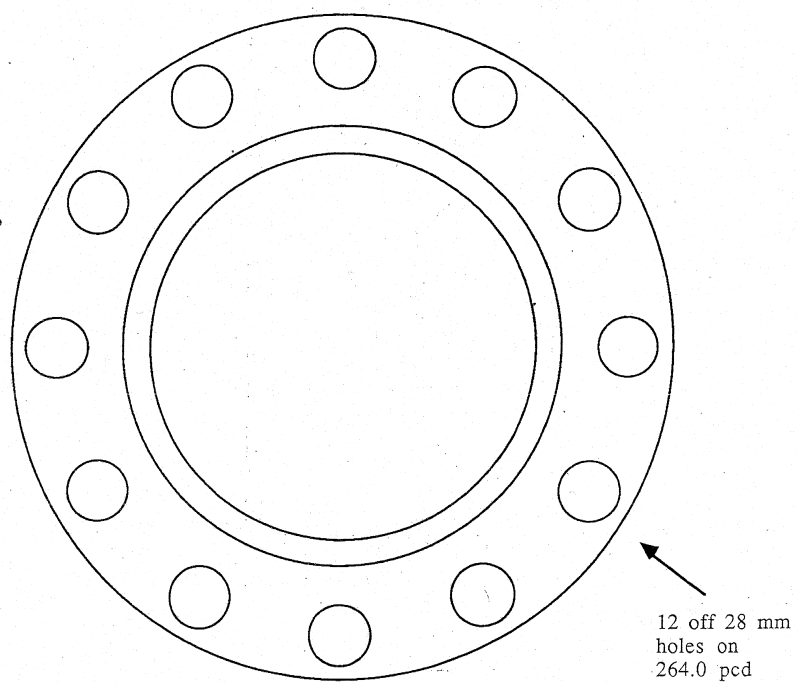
Technical drawing CT cell - Main aluminium frame (cross section)
